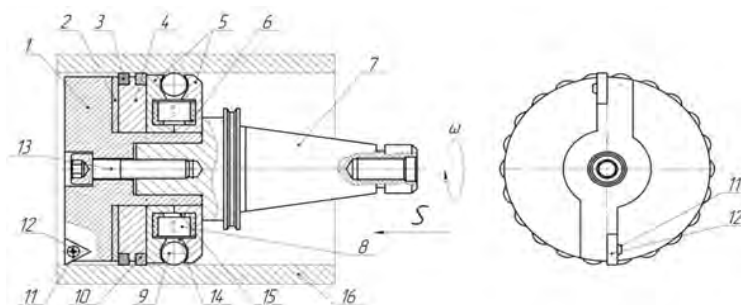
Tool for combined processing: 1 – boring head; 2 – sealing ring; 3 – brush; 4 – bushing; 5 – discs; 6 – holder; 7 – milling mandrel; 8 – sources of magnetic force (cylindrical permanent magnets); 9 – deforming elements; 10 – felt bushing; 11 – screw; 12 – carbide cutting insert; 13 – screw; 14 – annular chamber; 15 – radial holes; 16 – workpiece
